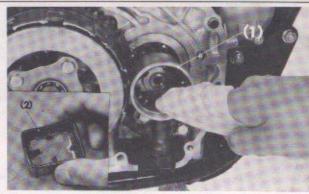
(1) Oil filter rotor (2) Screen filter
